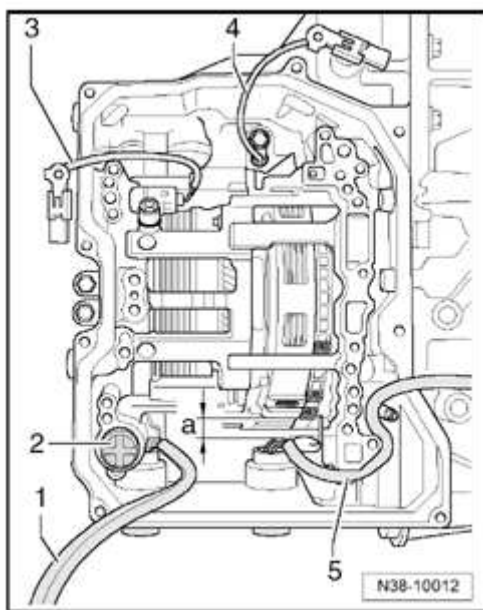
Valve Body Wiring Harness And Damping Plunger
